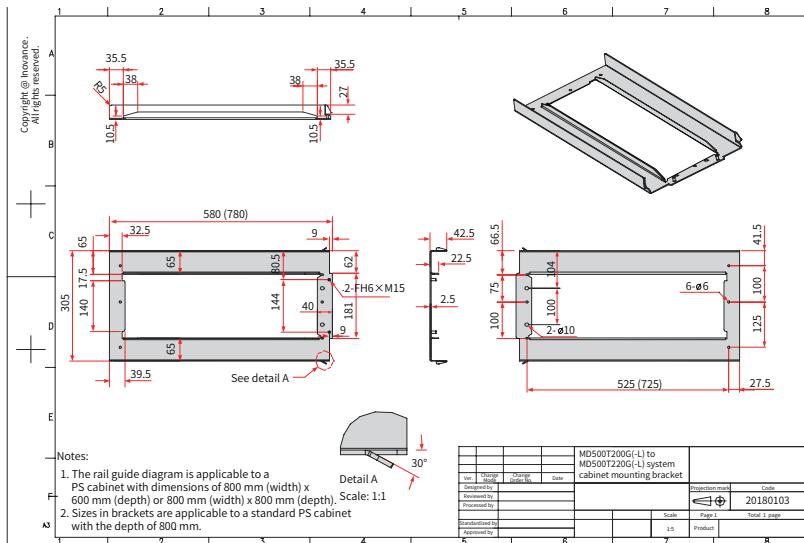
Dimensions of the mounting bracket for 200–220 kW AC drives (standard configuration) (mm)
